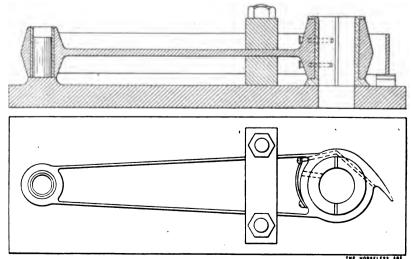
Jig for Machining Connecting Rod Big End Bearings.
